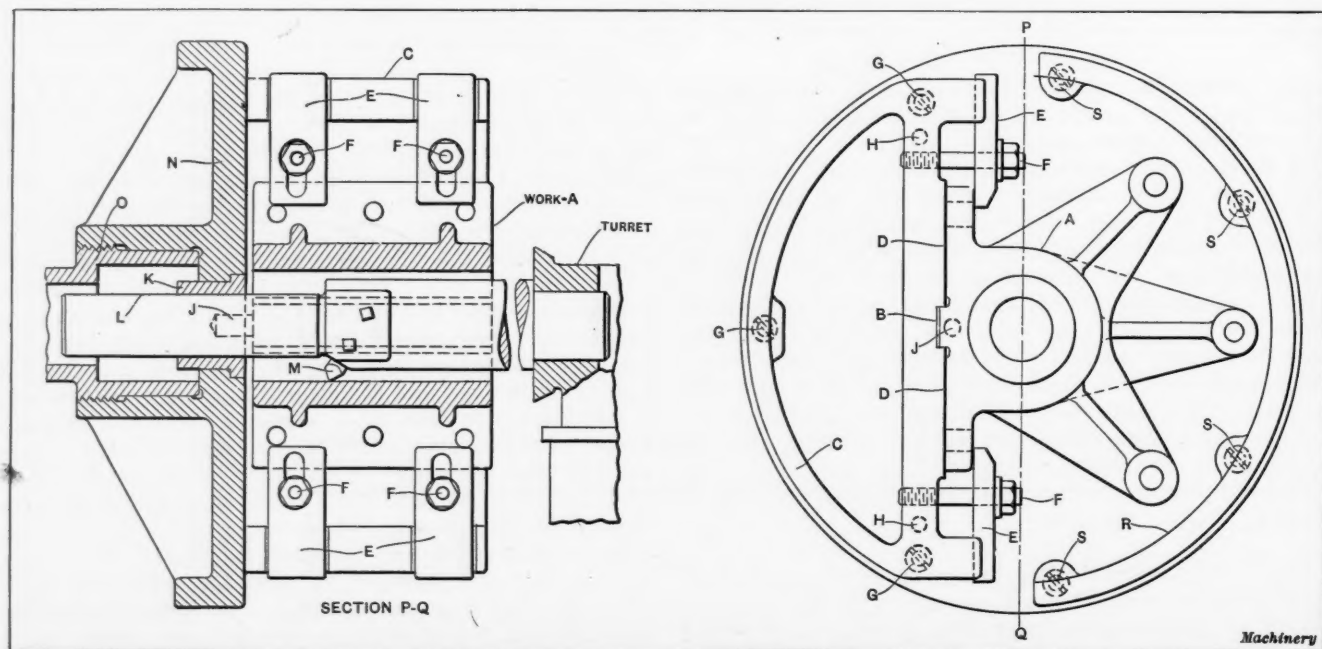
Fixture for boring Irregular Castings on Horizontal Turret Lathe
